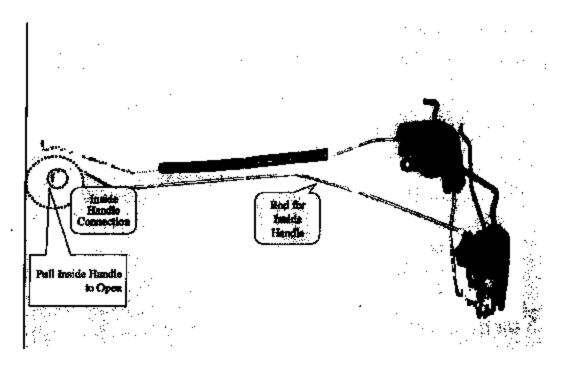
a. Optima Door Handle Assembly (Source: KMC)
